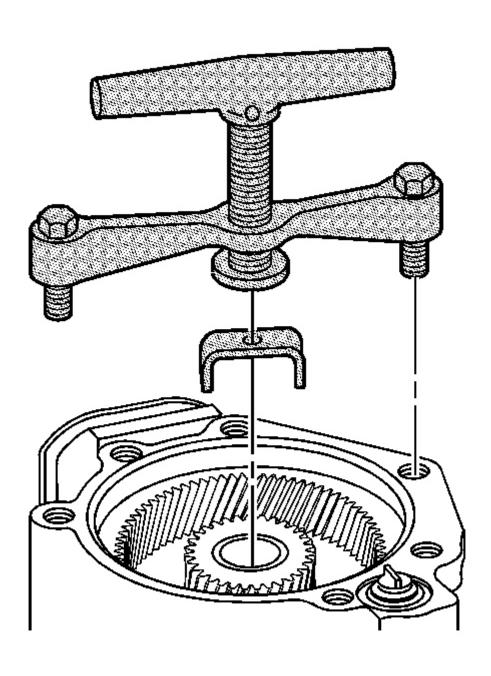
Installing J 33381-A Into Input Clutch Housing Courtesy of GENERAL MOTORS CORP.
